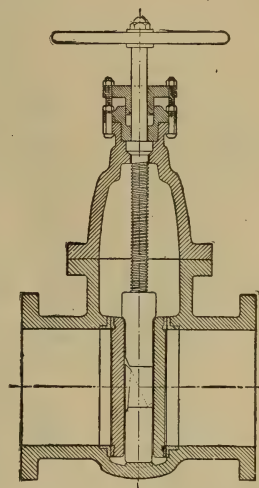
A Typical Gate Valve, Split-wedge, Bolt-top, Inside Screw.
